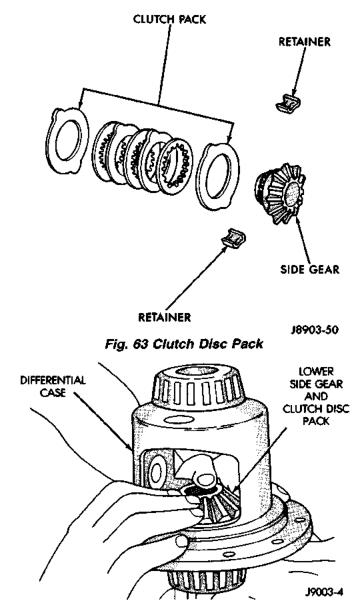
Clutch Discs and Ring Gear Side Gear Installation
